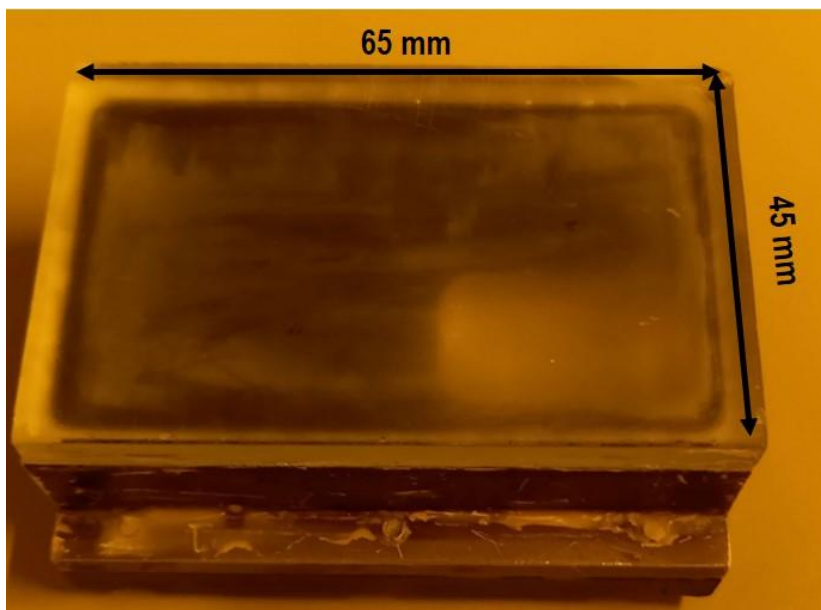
Building platform consisting of a glass plate fixed to a metal mounting.
